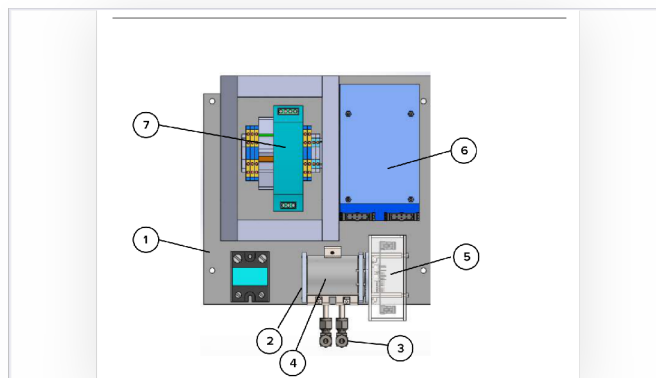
Analyzer module: 1 mounting plate • 2 optical cuvette • 3 gas inlet / outlet flanges • 4 heater • 5 signal-acquisition board • 6 motherboard • 7 power supply
